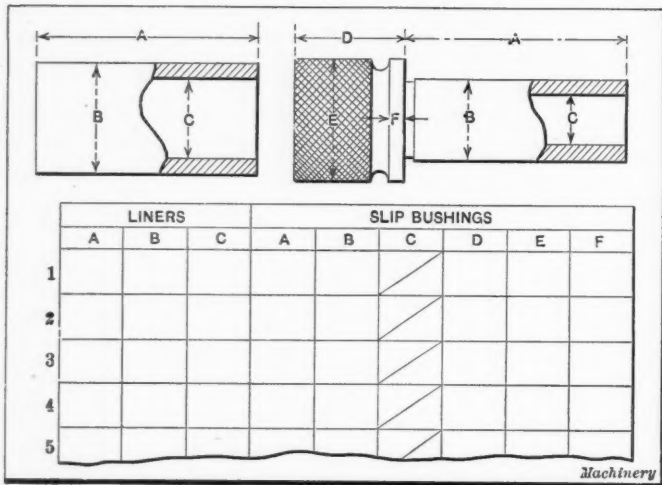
Arrangement of Table of Jig Bushing Dimensions
